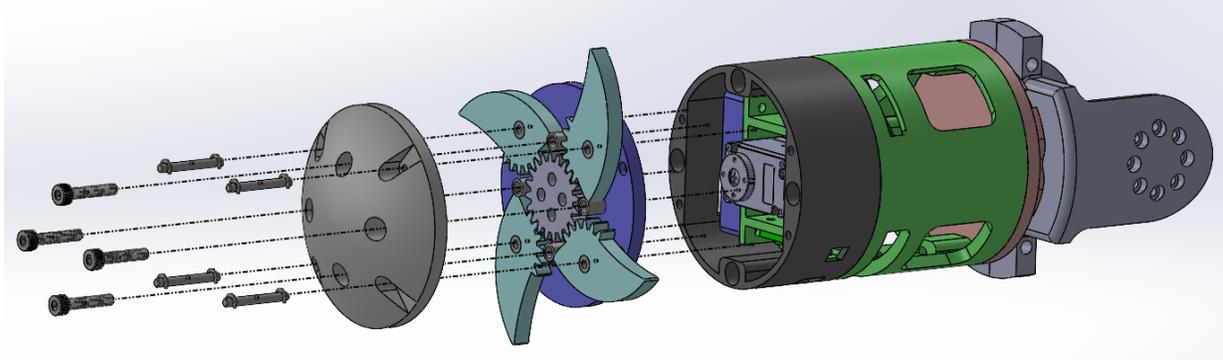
Exploded View of Latching Mechanism with Head Module Components
